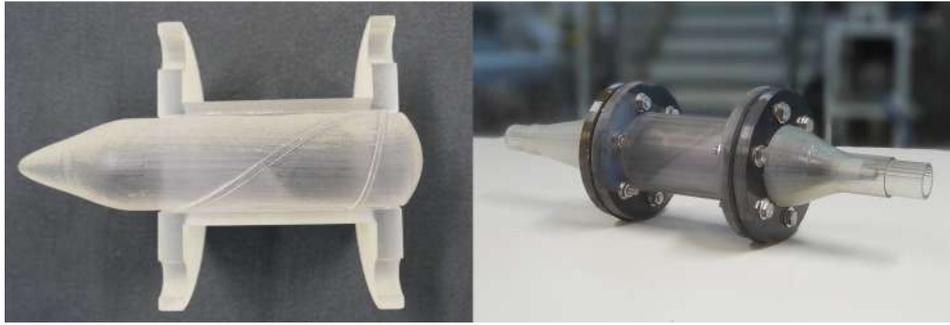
a) (Left) Cyclonic valve (cross section showing the internal directional ramps). b) (Right) Final version of the valve.
